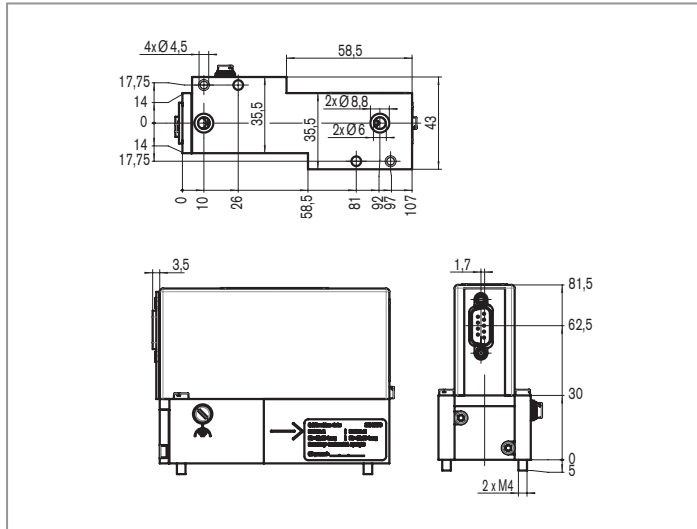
Dimensions of MFM with flanges, types 8703 and 8705, and MFC with flanges, types 8713 and 8715
